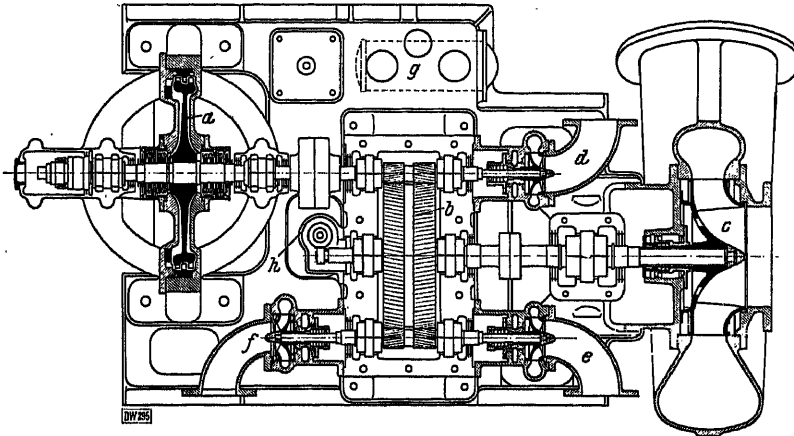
B.B.C.*, auxiliary turbo-pump set for cargo boat
